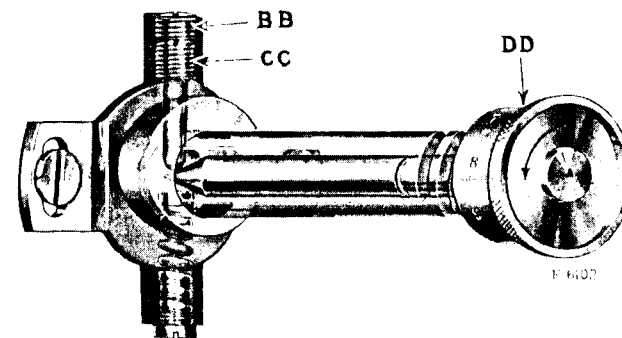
"X-Ray" View of Feed Driving Eccentric Regulating Bracket and Shaft Showing the Feed Regulating Spindle and Adjusting Screw (CC) Which Comes in Contact with the Cone of the Spindle to Gauge the Length of Stitch
